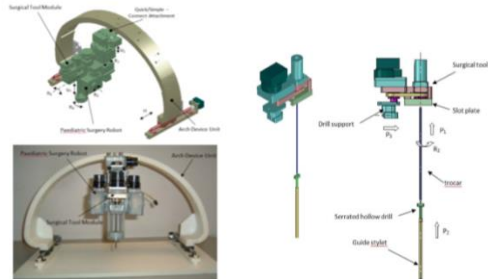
Left: PSR System, Right: Surgical Tool Module.
